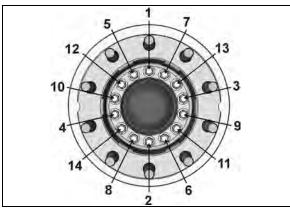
HUB FLANGE HEX CAP SCREV TIGHTENING SEQUENCE
